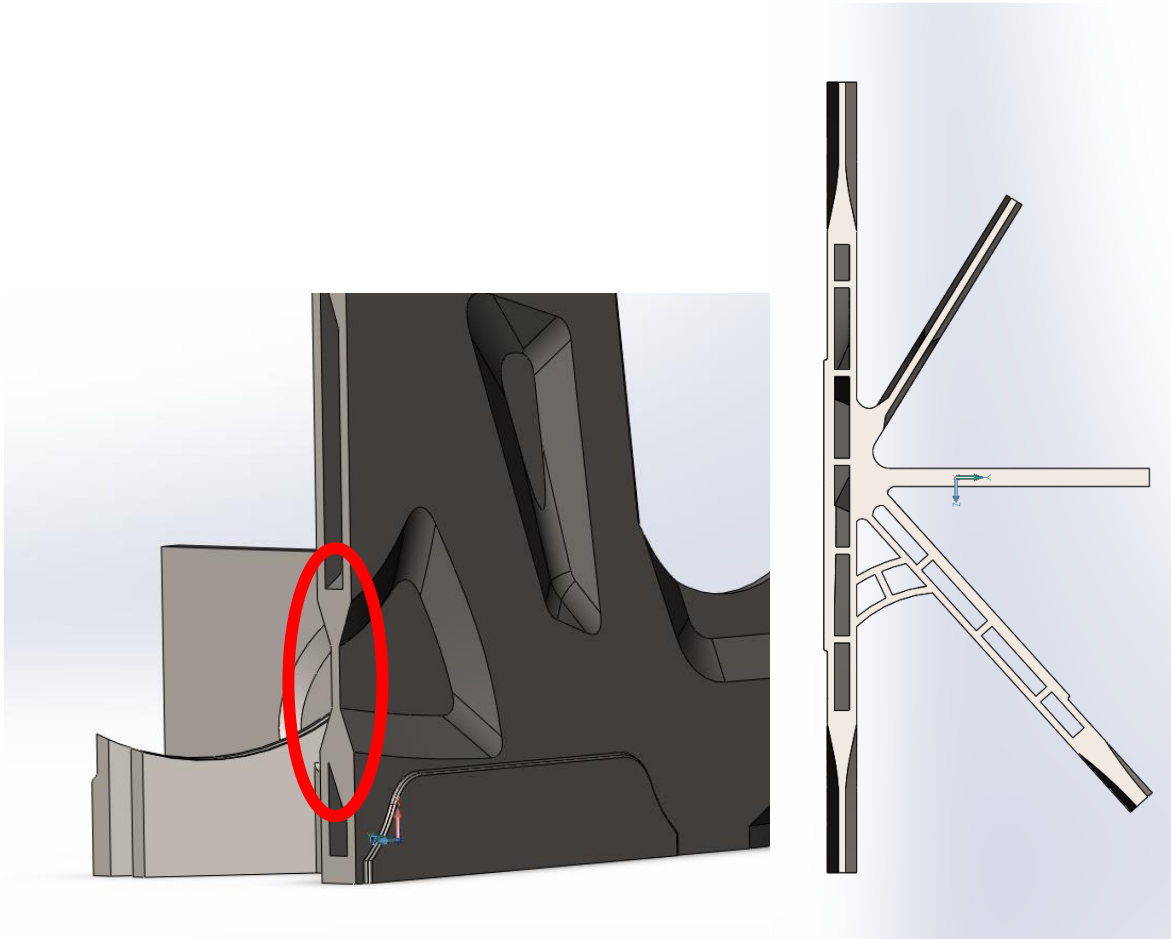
Cross section of designed part showing light-weighted section (left) and wall structure (right)
